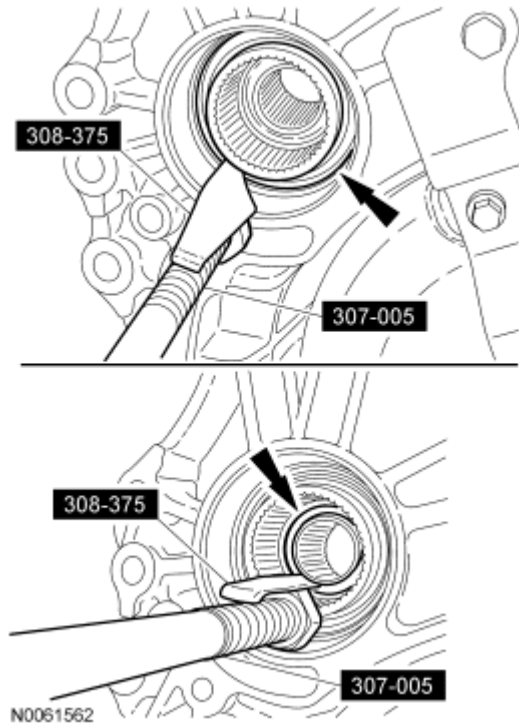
Identifying Differential Fluid Seals & Special Tools (307-005, 308-375)
